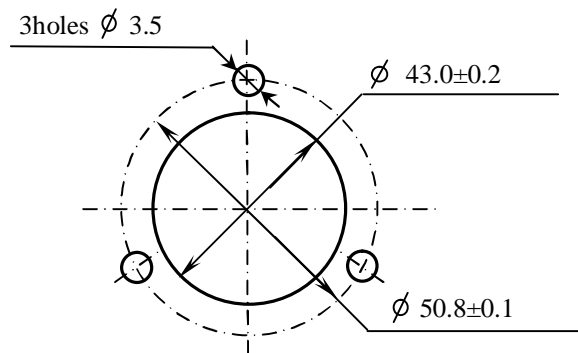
Mounting Dimensions of the ZBG-5-003-100 Hand Wheel
